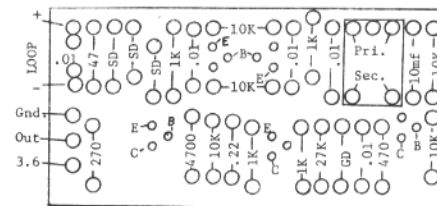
Parts placement for the circuit board. Circles correspond to the foil pads in fig. 2. Components are mounted behind the board as it is viewed here. "SD" denotes any of the three silicon diodes; "GD" denotes the germanium diode.
